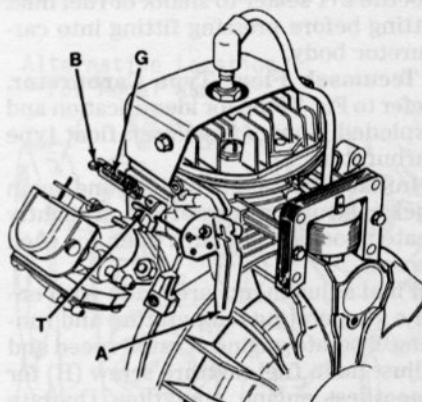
View of horizontal engine using an aluminum air vane (A). The air vane is attached to the carburetor throttle shaft (T) and tension of governor spring (G) holds throttle (T) open. Reposition bracket (B) to adjust engine speed.
